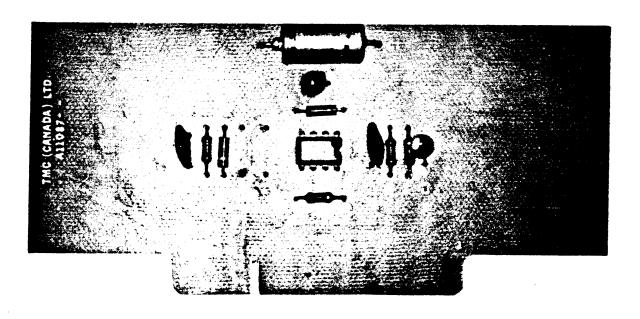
VARIABLE TONE GENERATOR ASSEMBLY A11087-5
